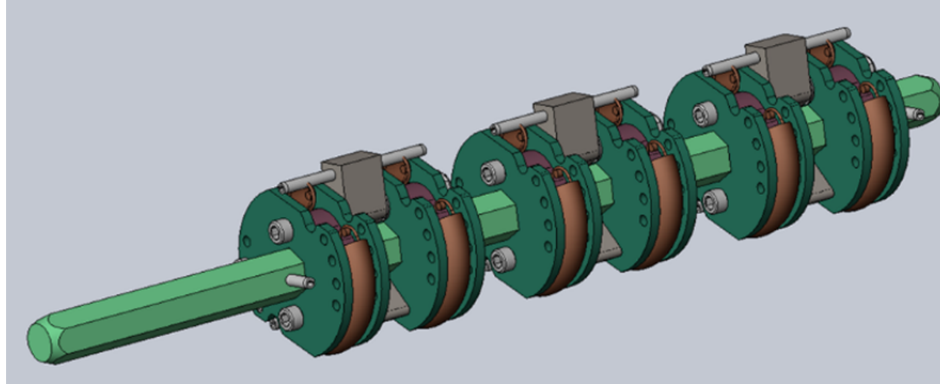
CAD drawing of the original hammer assembly with restoring springs.
